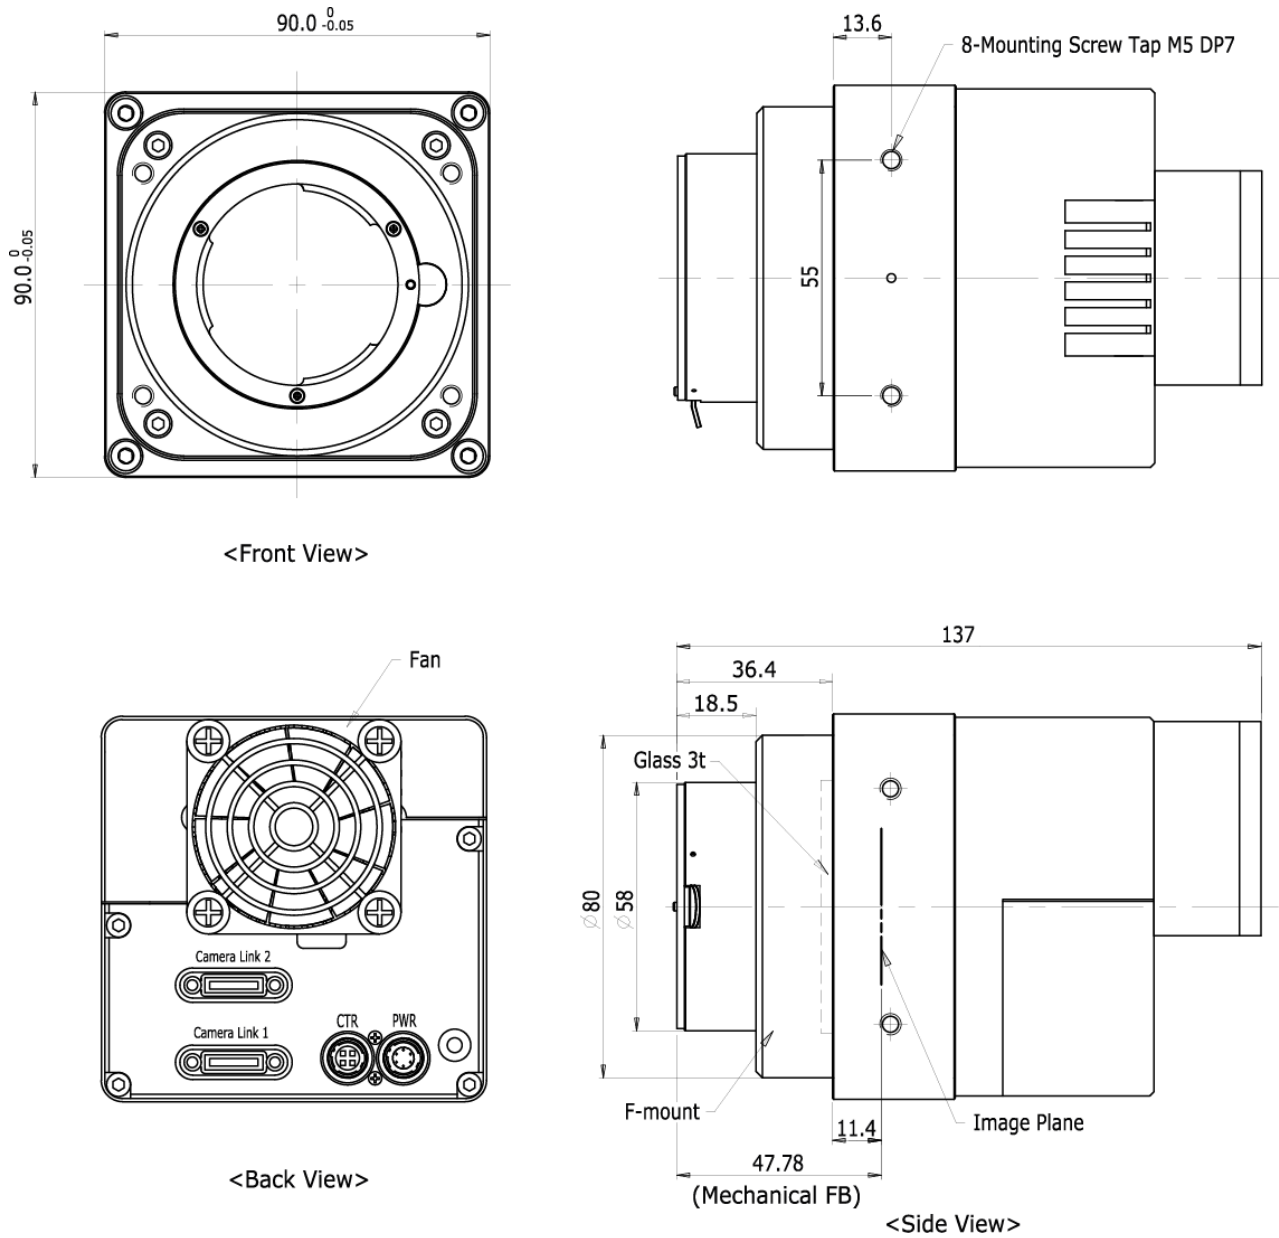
VP-71MC Camera Link F-mount Mechanical Dimension
